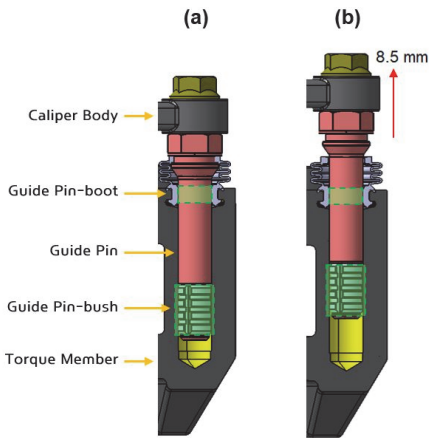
Caliper cross section according to pad conditions (a) new pad (b) wear pad
